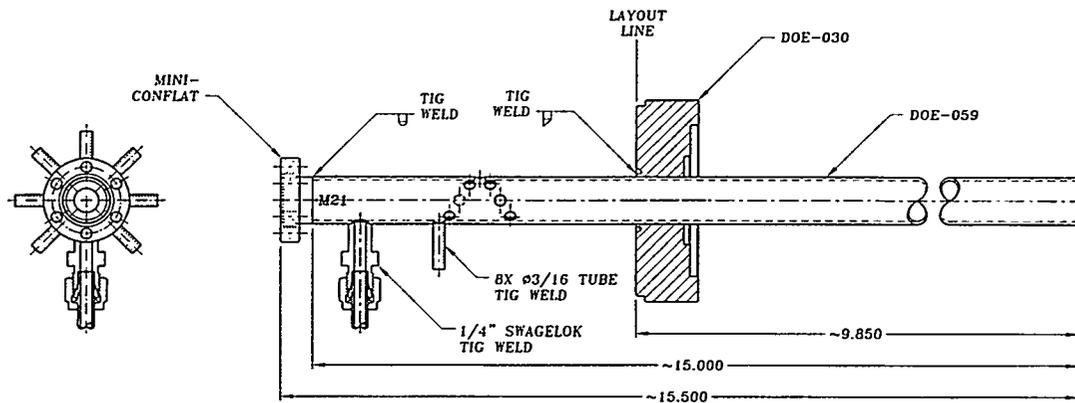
The Drawing the Alloy 600 tube showing the high pressure fitting and the thermocouple feed throughs.
